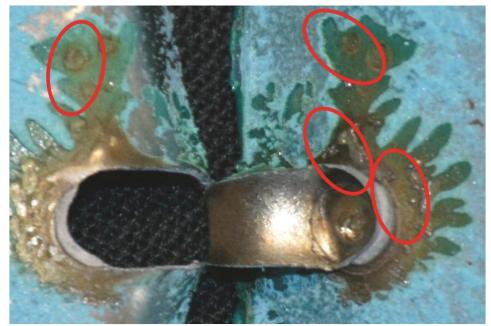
View of the joint with the expulsion during the welding process. Marks of solidified metal squeezed from the weld nugget were marked. Destruction of the weld joint through full plug mode [14]
